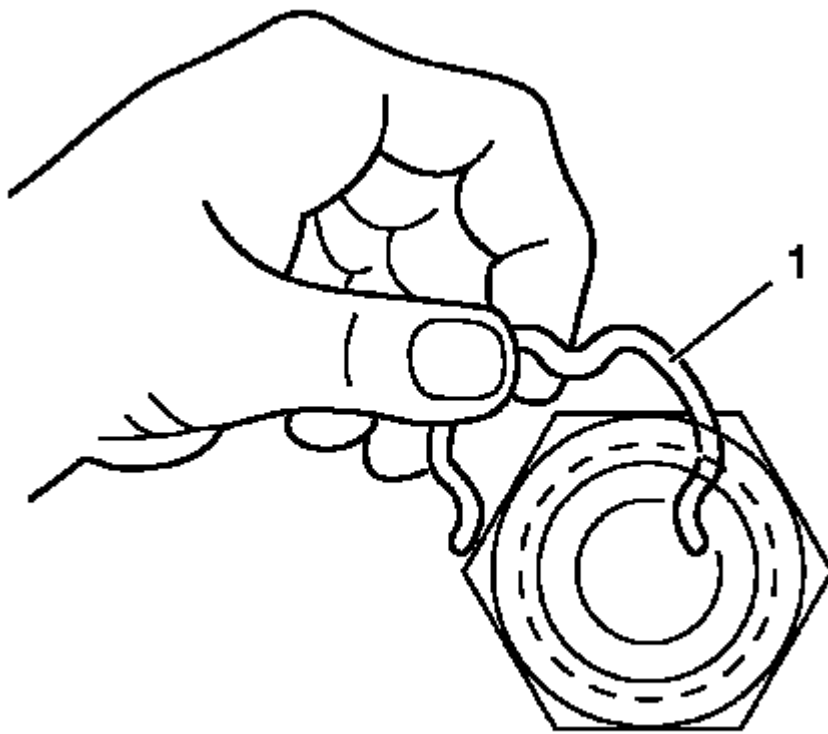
Automatic Transmission Oil Cooler Fitting Retaining Ring
